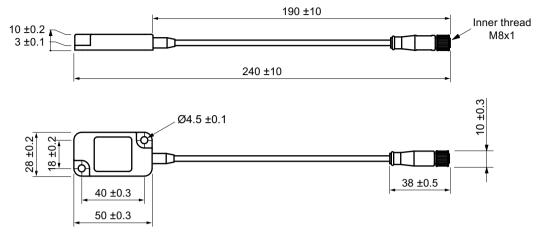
Dimension drawing ANT 3S (all values in mm)
